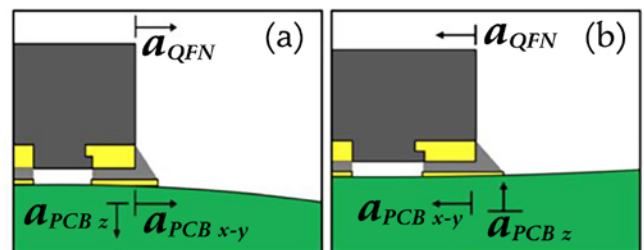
Examples of thermal cycling-driven PCB and component warpage. Direction of board and package expansion around the corner joint in QFN at (a) low and (b) high temperatures.
